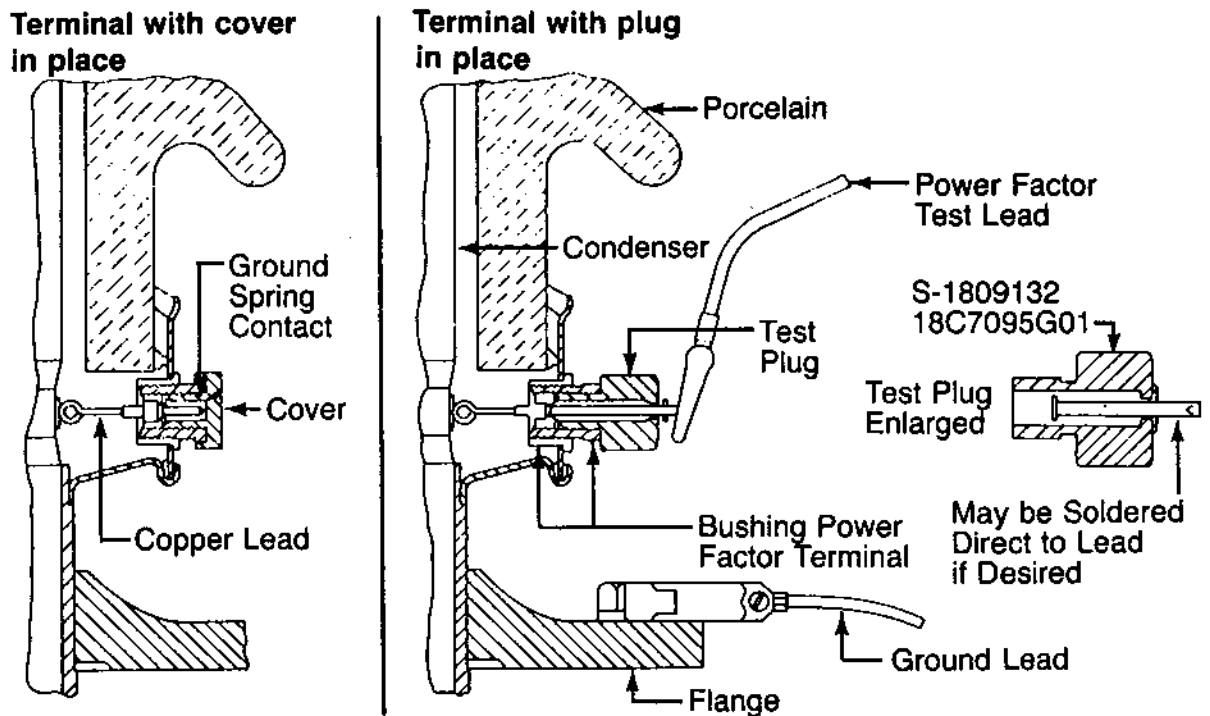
Power Factor Testing Terminal for Making Ungrounded Power Factor Tests on Condenser Bushings. 69 kV and Below.
